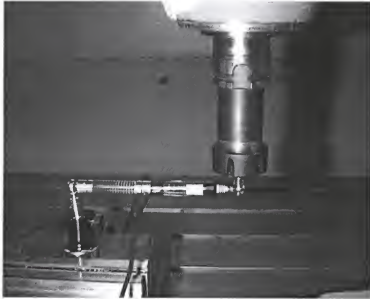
The Renishaw Ball Bar installed on the Hexel milling machine.
